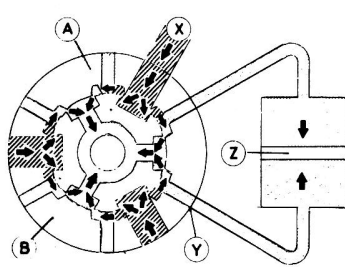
OPERATING DIAGRAM OF THE ROTOR VALVE (STRAIGHT AHEAD)
